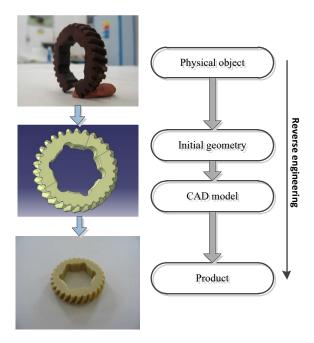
The process of prototype production of a damaged gear (Modified from Dúbravčík and Kender, 2012).
